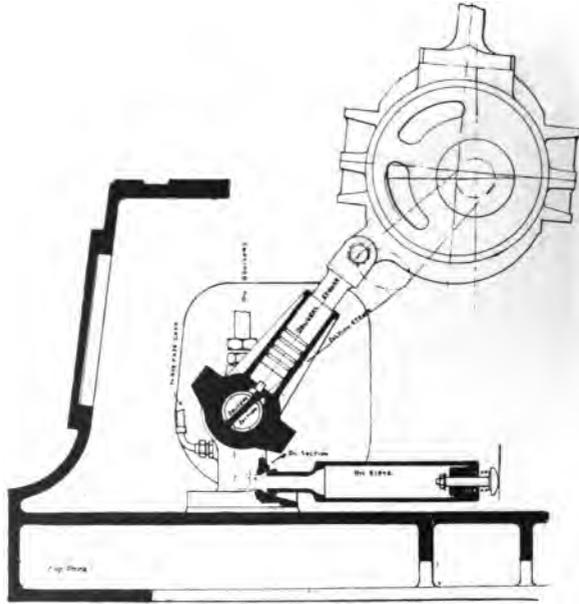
"CLAYTON" ARRANGEMENT OF VALVELESS OSCILLATING OIL PUMP.
